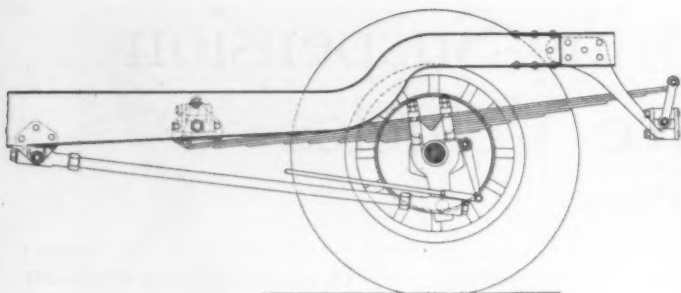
SCHEMATIC DRAWING OF A RECENTLY DEVELOPED SPRING-SUSPENSION
